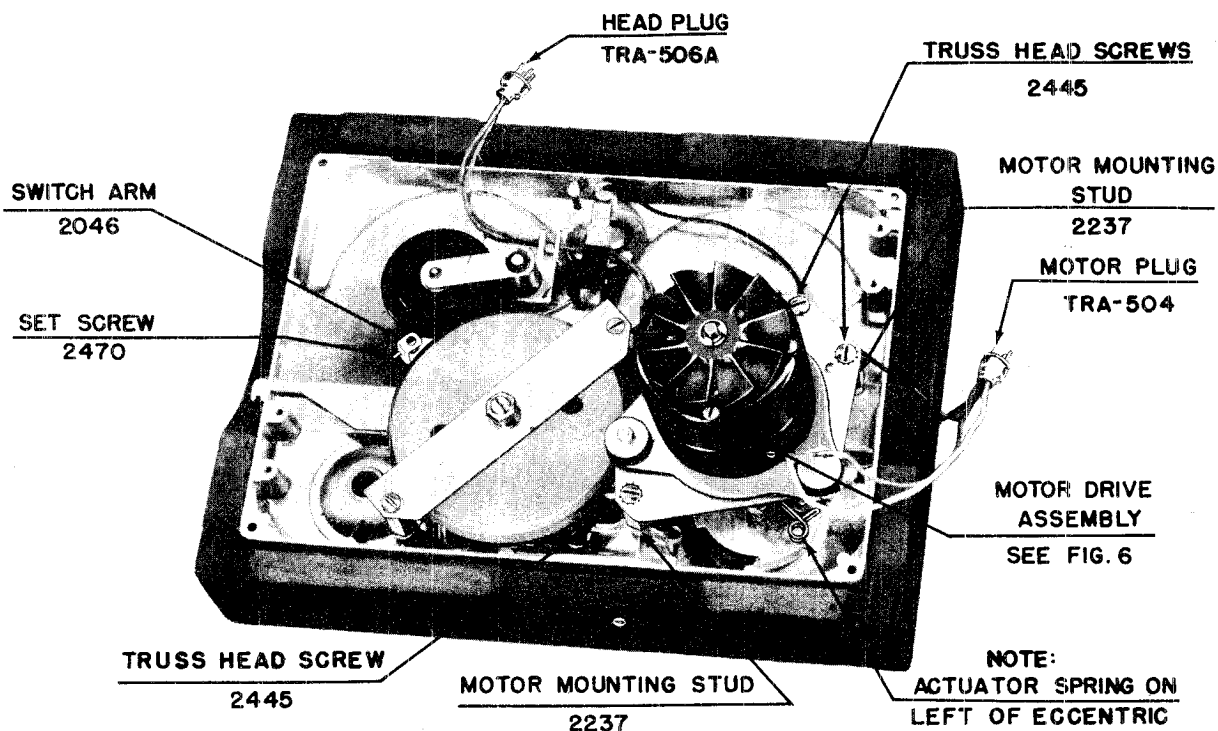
Bottom View of Recorder with Case and Amplifier Removed.
